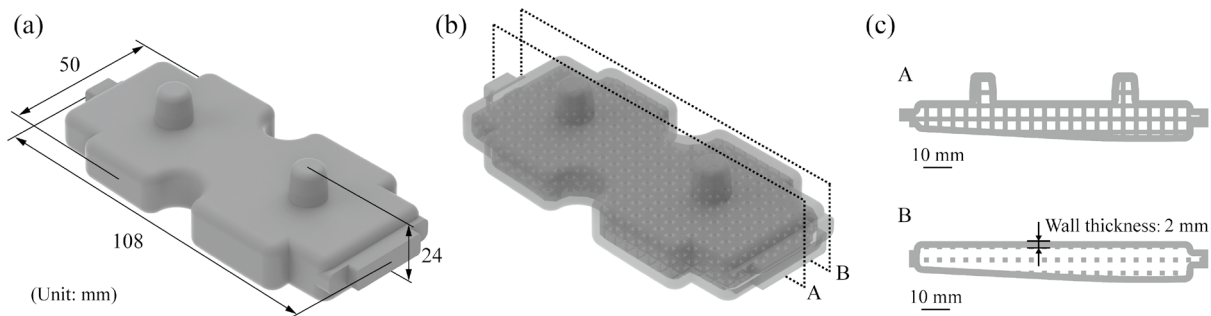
CAD model of the hollow ceramic cores: (a) external shape; (b) complete structure; (c) slices
